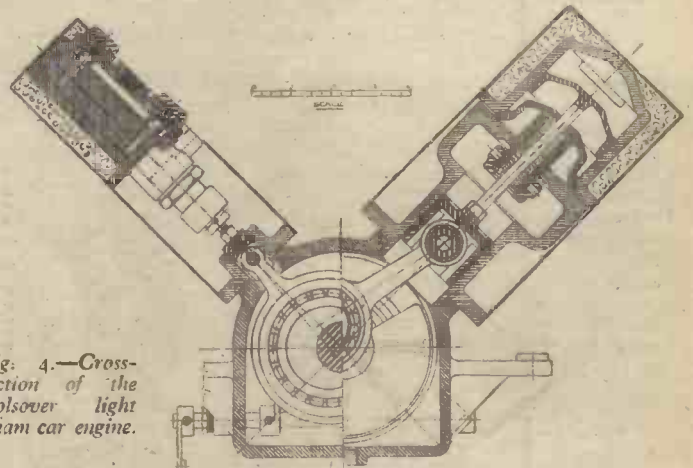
Cross-section of the Bolsover light steam car engine.
